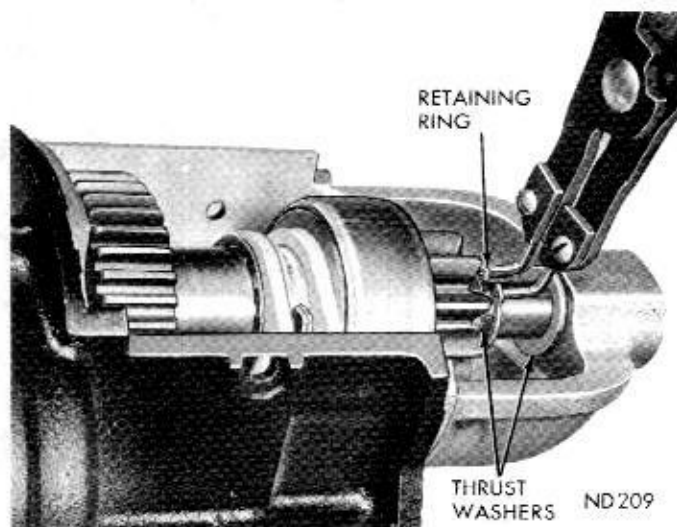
Removing or Installing Pinion Shaft Retainer Ring
